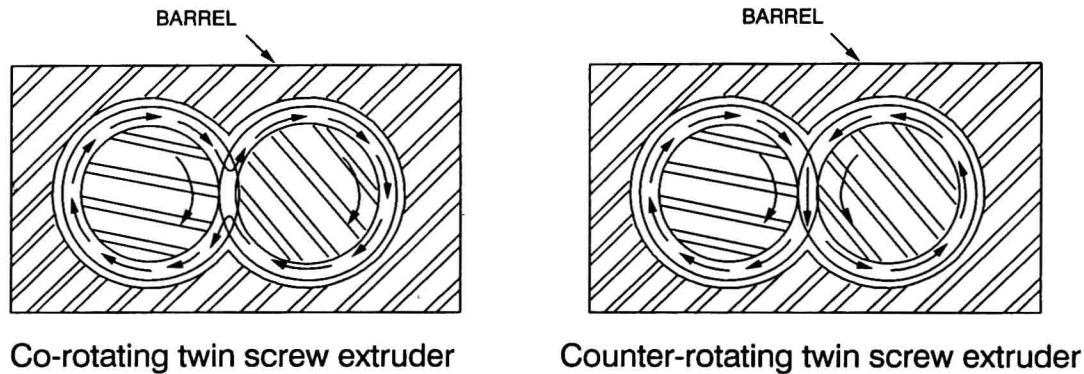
Cross-sectional view of corotating and counterrotating twin-screw extruders.
